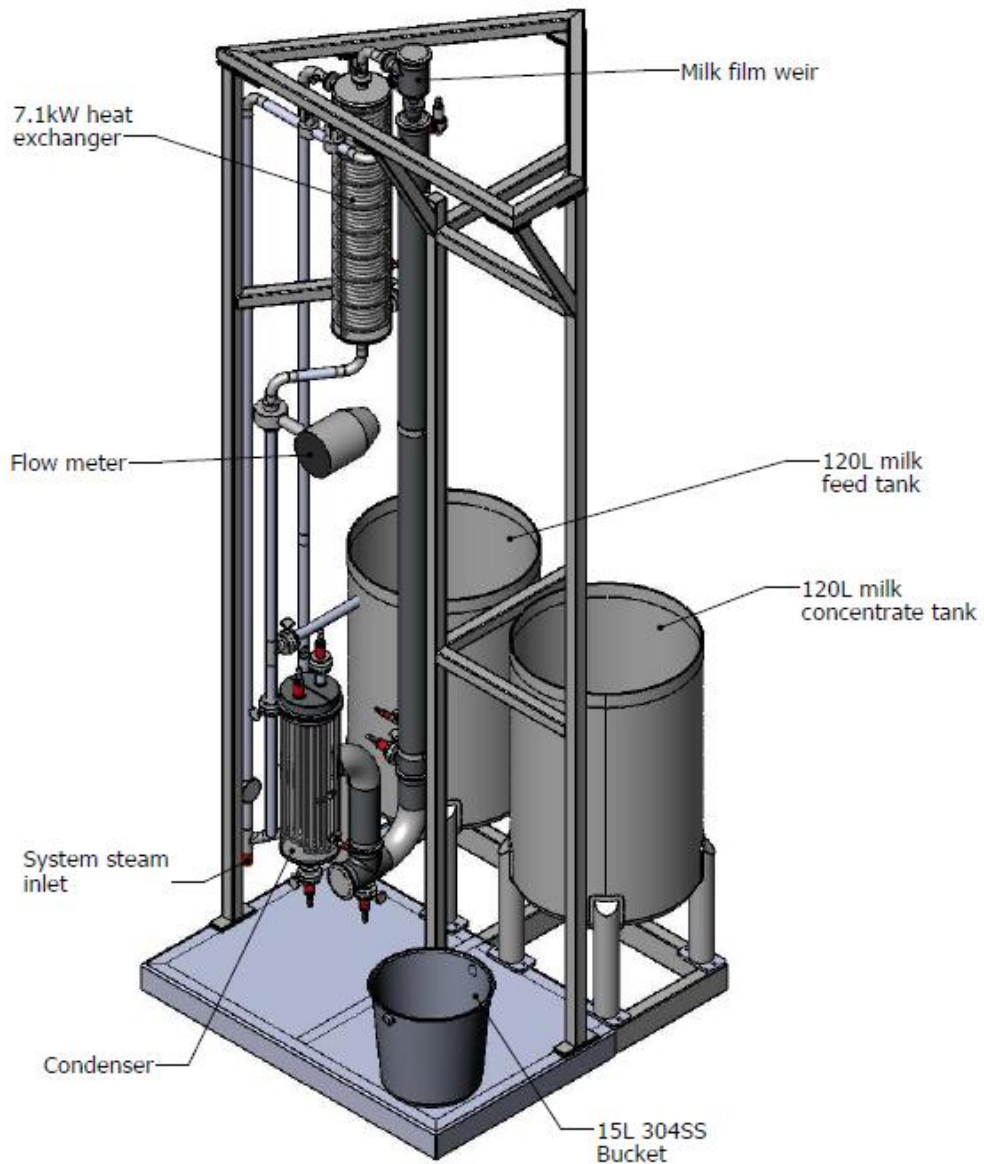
CAD drawing of the steam-heated pilot evaporator
